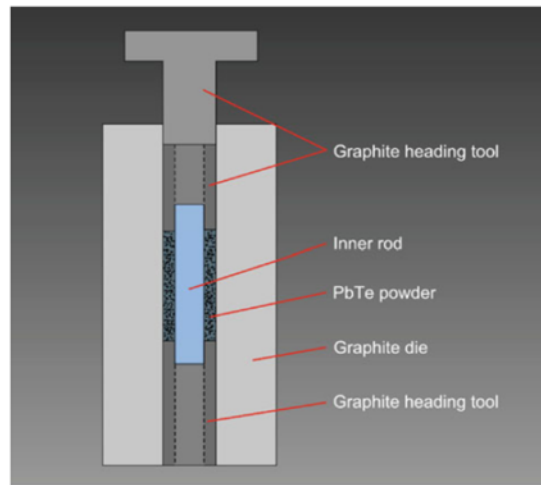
Sectional view of the sintering mold construction. The material of the inner rod is chosen to match the CTE of the thermoelectric material. Both heading tools are constructed as tubes, so that the inner rod can be pushed out of the mold after sintering without removing the sintered sample (Schmitz et al., 2013)
